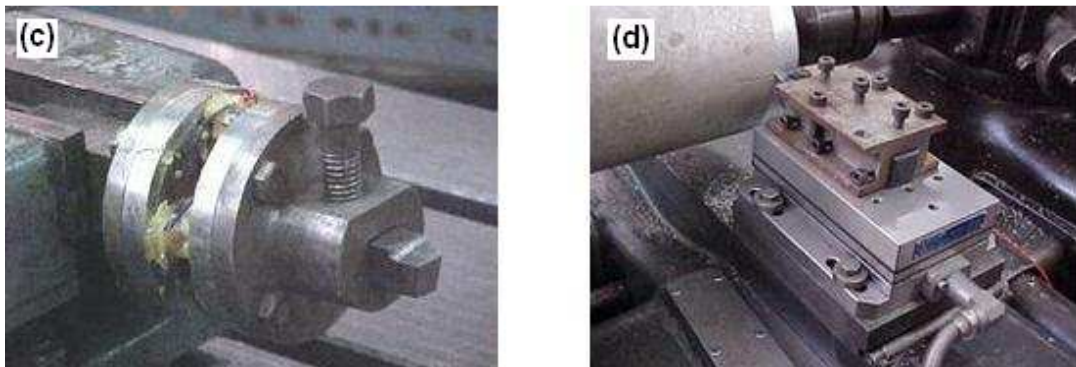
(c) Photographic view of a strain gauge type 2D turning dynamometer
